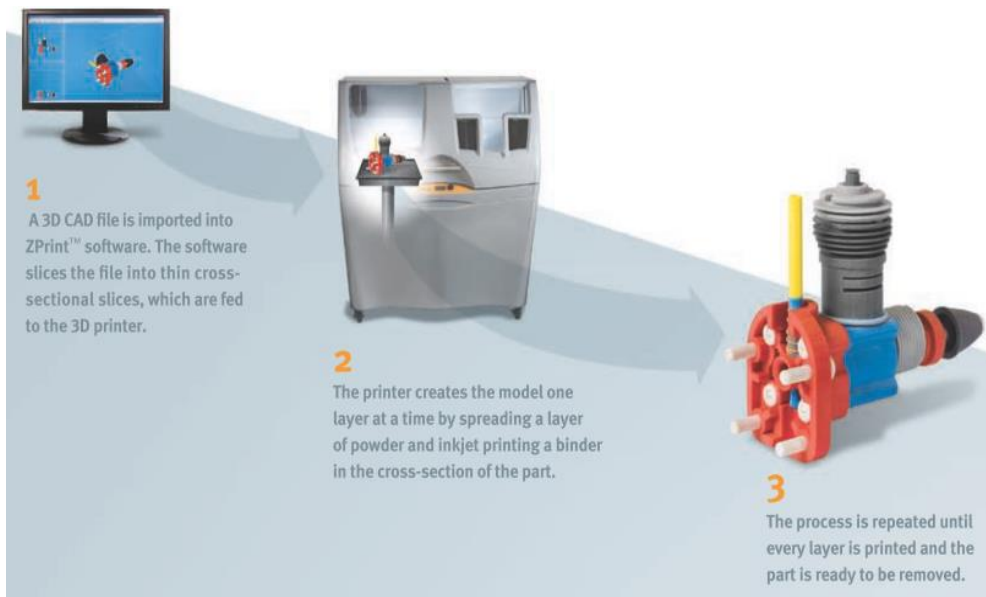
Schematics of color parts fabricated with ZCorp's 3D printer (Printers 2015).
